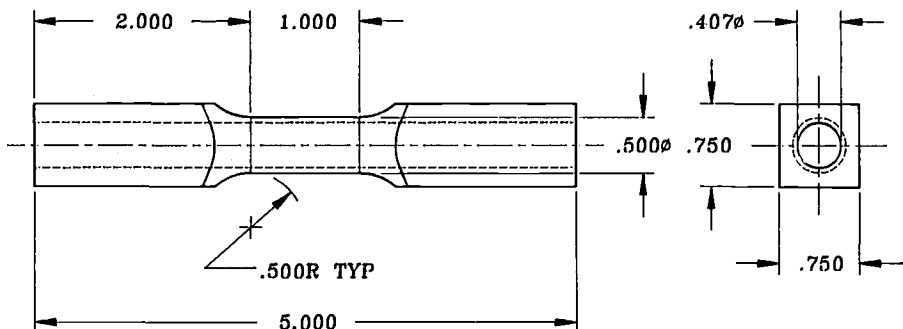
Thin-walled tubular solder specimen (dimensions in inches, 1 in. = 25.40 mm).
